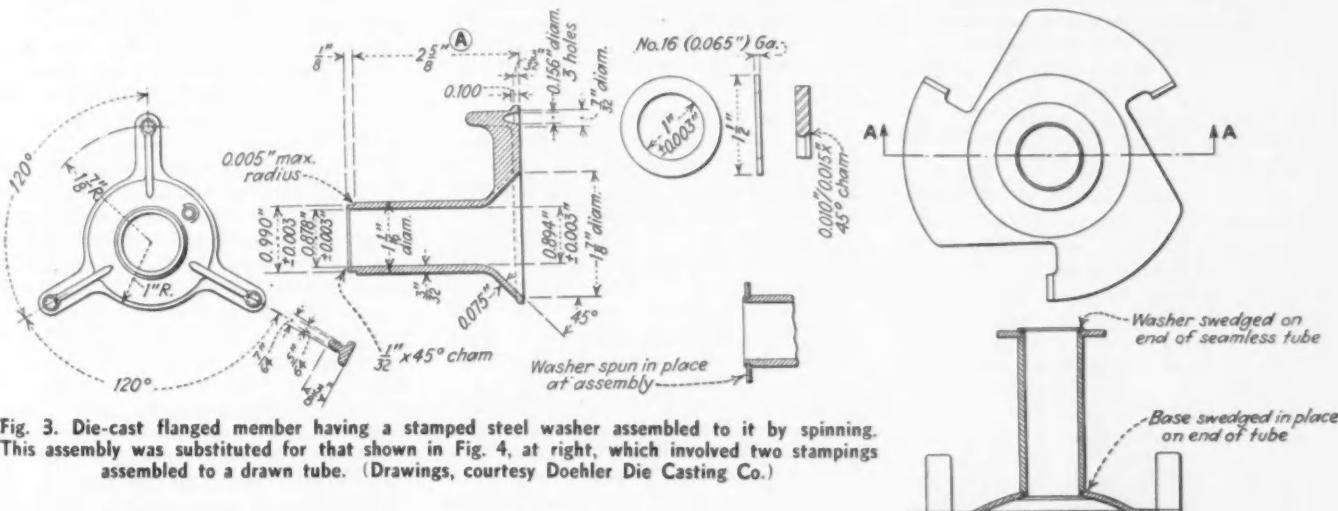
Die-cast flanged member having a stamped steel washer assembled to it by spinning. This assembly was substituted for that shown in Fig. 4, at right, which involved two stampings assembled to a drawn tube. (Drawings, courtesy Doehler Die Casting Co.)
